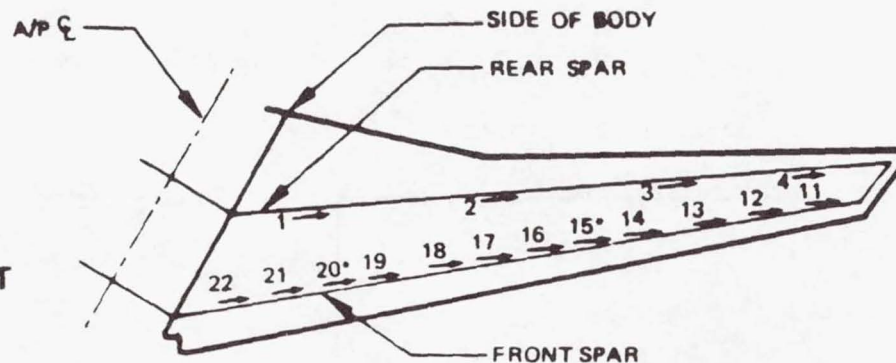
Panel test data example. Wing lower surface; typical stringer runout.
